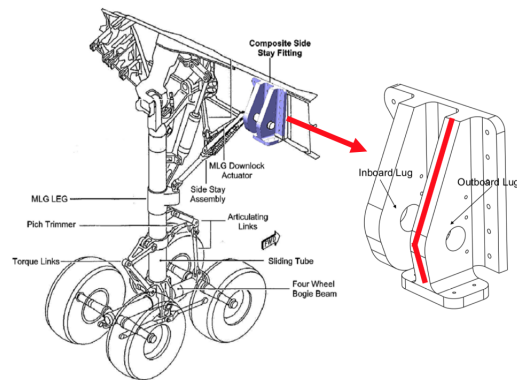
Typical Aircraft Landing Gear, and Side Stay Fitting [2]
